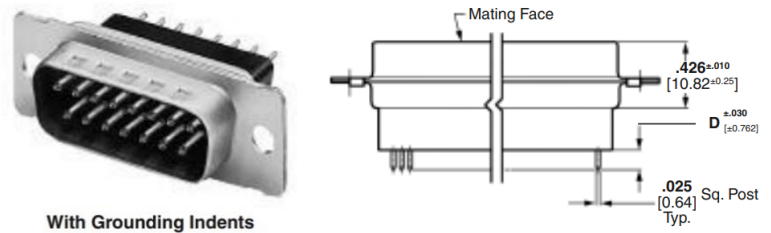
a D-Sub 15 connector with a straight through hole connection. If a PC/104 PCB can be close enough to an end mount this component may be a space saving option.
